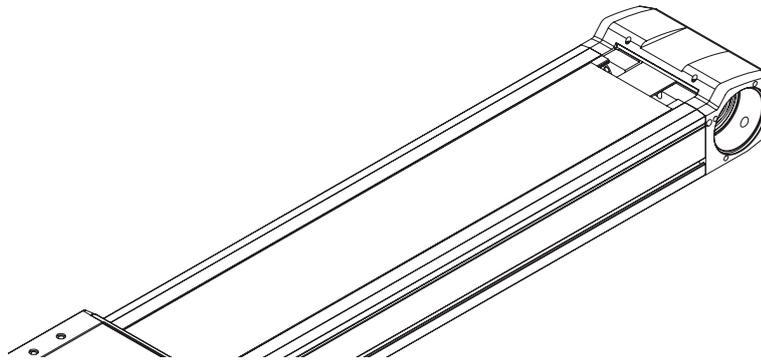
Mounting the cover strip under the cover strip clamp for HT-B
